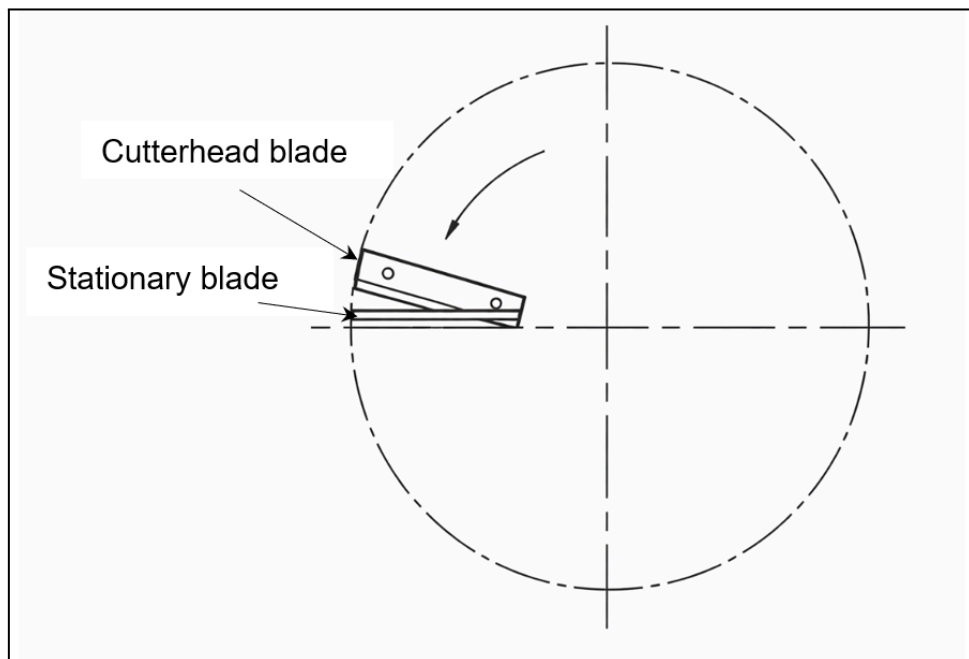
Flywheel type cutterhead (AMTEC-UPLB, 2005)
